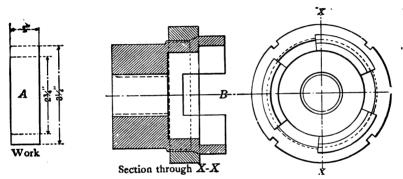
Adjustable spring chuck for grinding rings internally.
